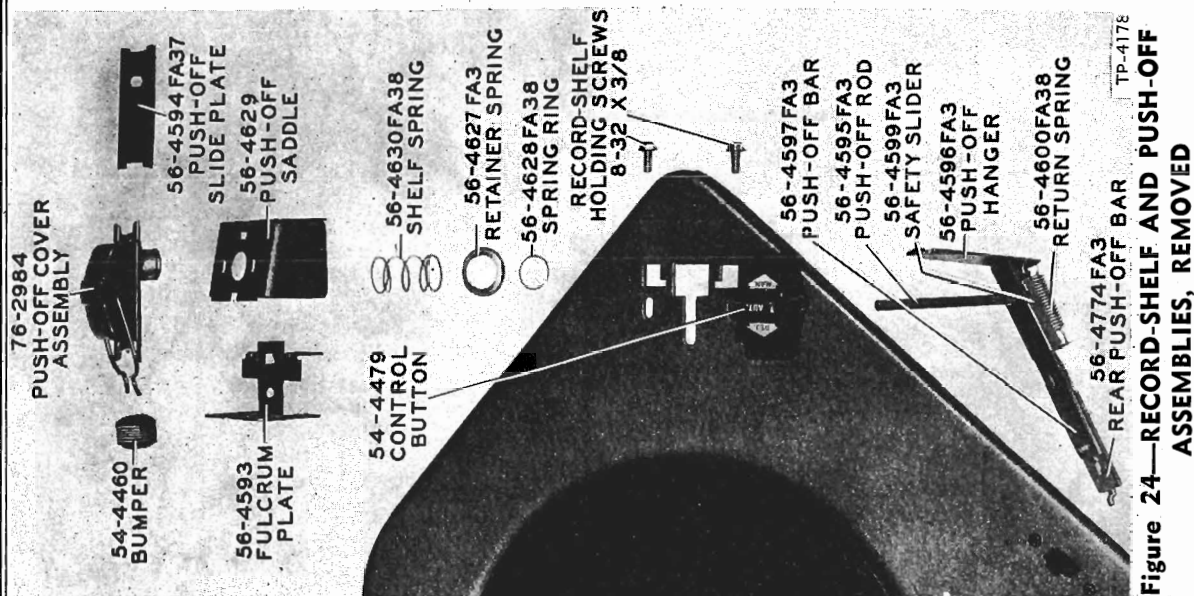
RECORD-SHELF AND PUSH-OFF ASSEMBLIES, REMOVED
